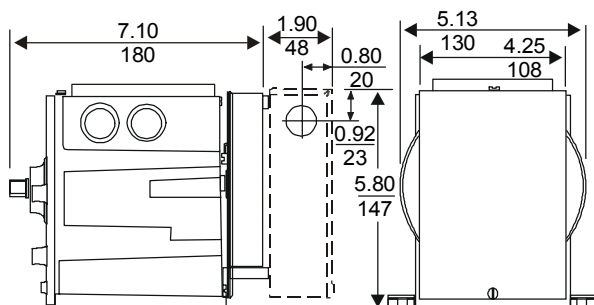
M100E Spring Return with Switch Kit, in. (mm)
